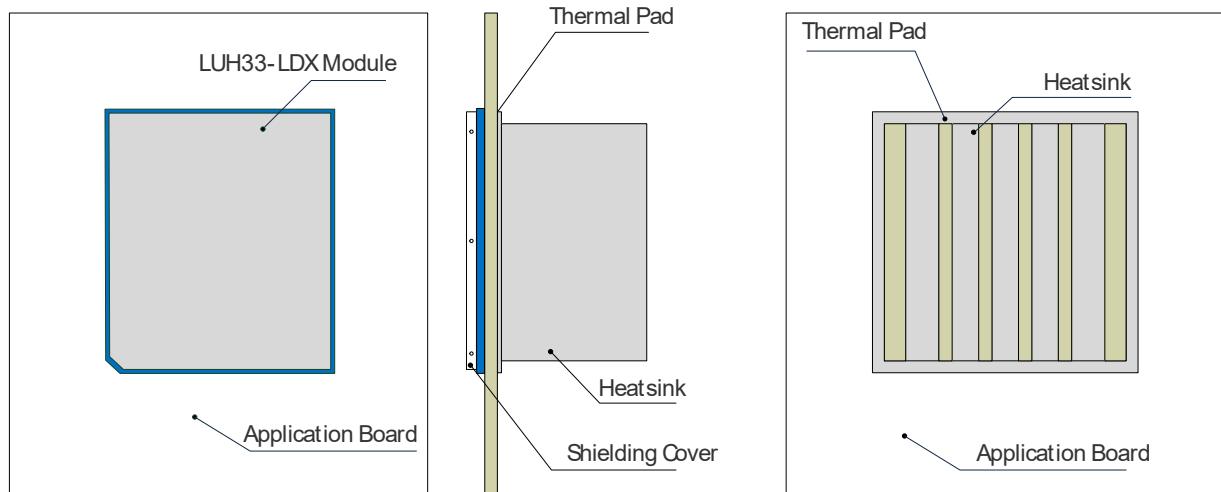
Referenced Heatsink Design (Heatsink at the Backside of the PCB)
